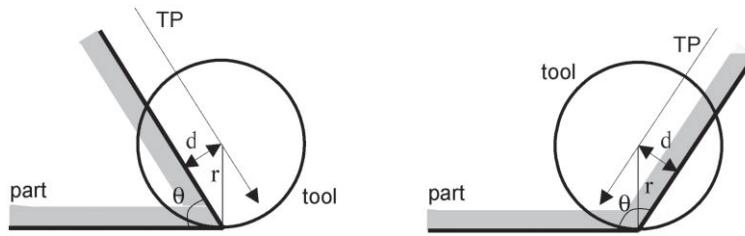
Tool exits in two-dimensional convex polygonal profiles
